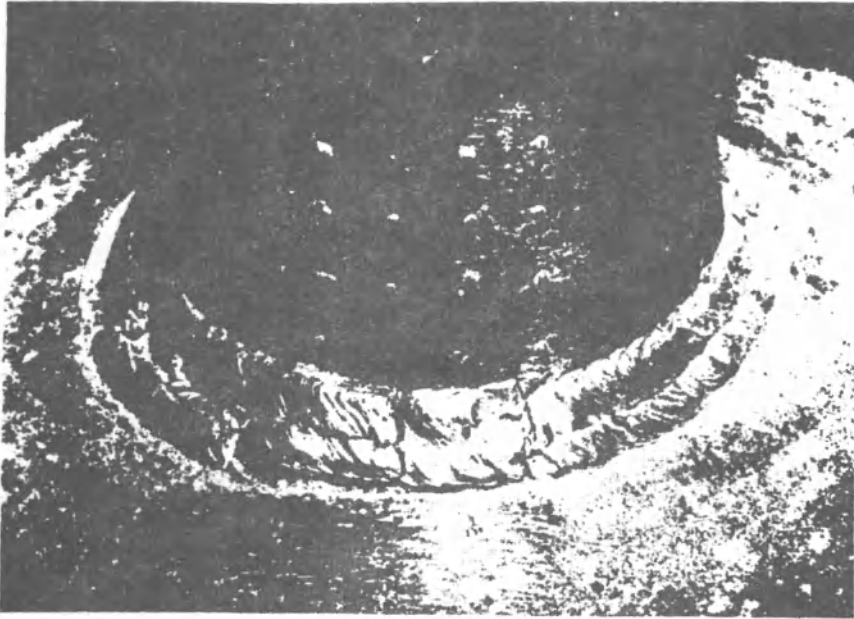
Creep rupture failure in mild steel weld attaching nozzle to pressure vessel after 1200 hr at 450°C, under internal pressure producing creep strain of 6 %
